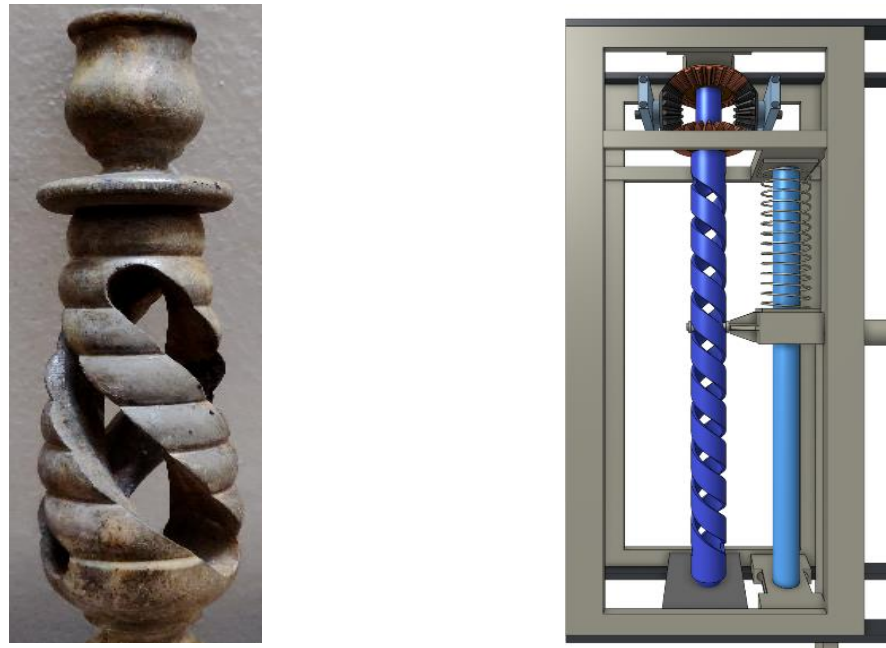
Transmission mechanism (a) inspirational candle stand (b) CAD model
